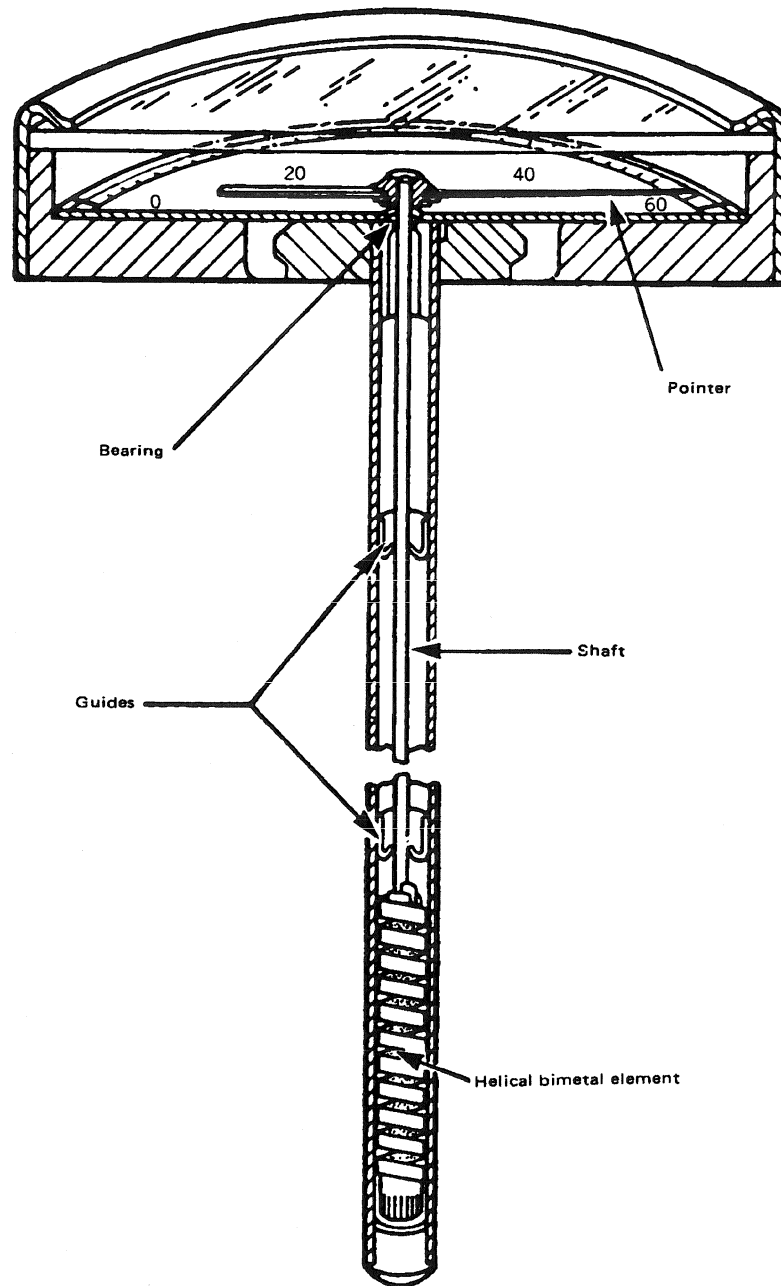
Sectional view of thermometer with helical-type bimetal element.
